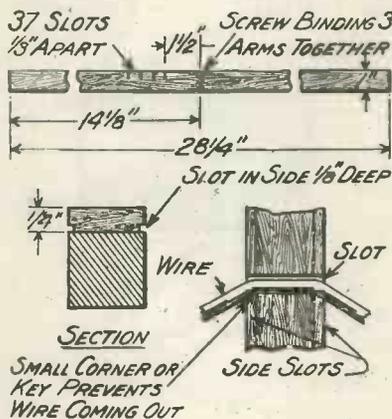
Further details of the cross-arms, showing the slots which hold the wire.
